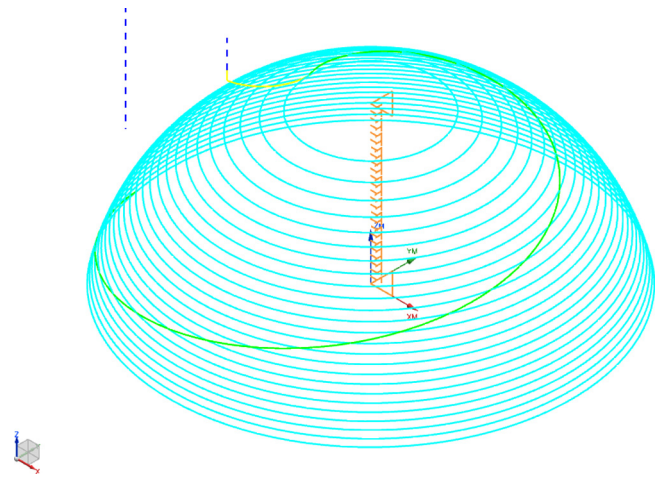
Z-level milling tool path for hemisphere: ramp angle = 10° .
